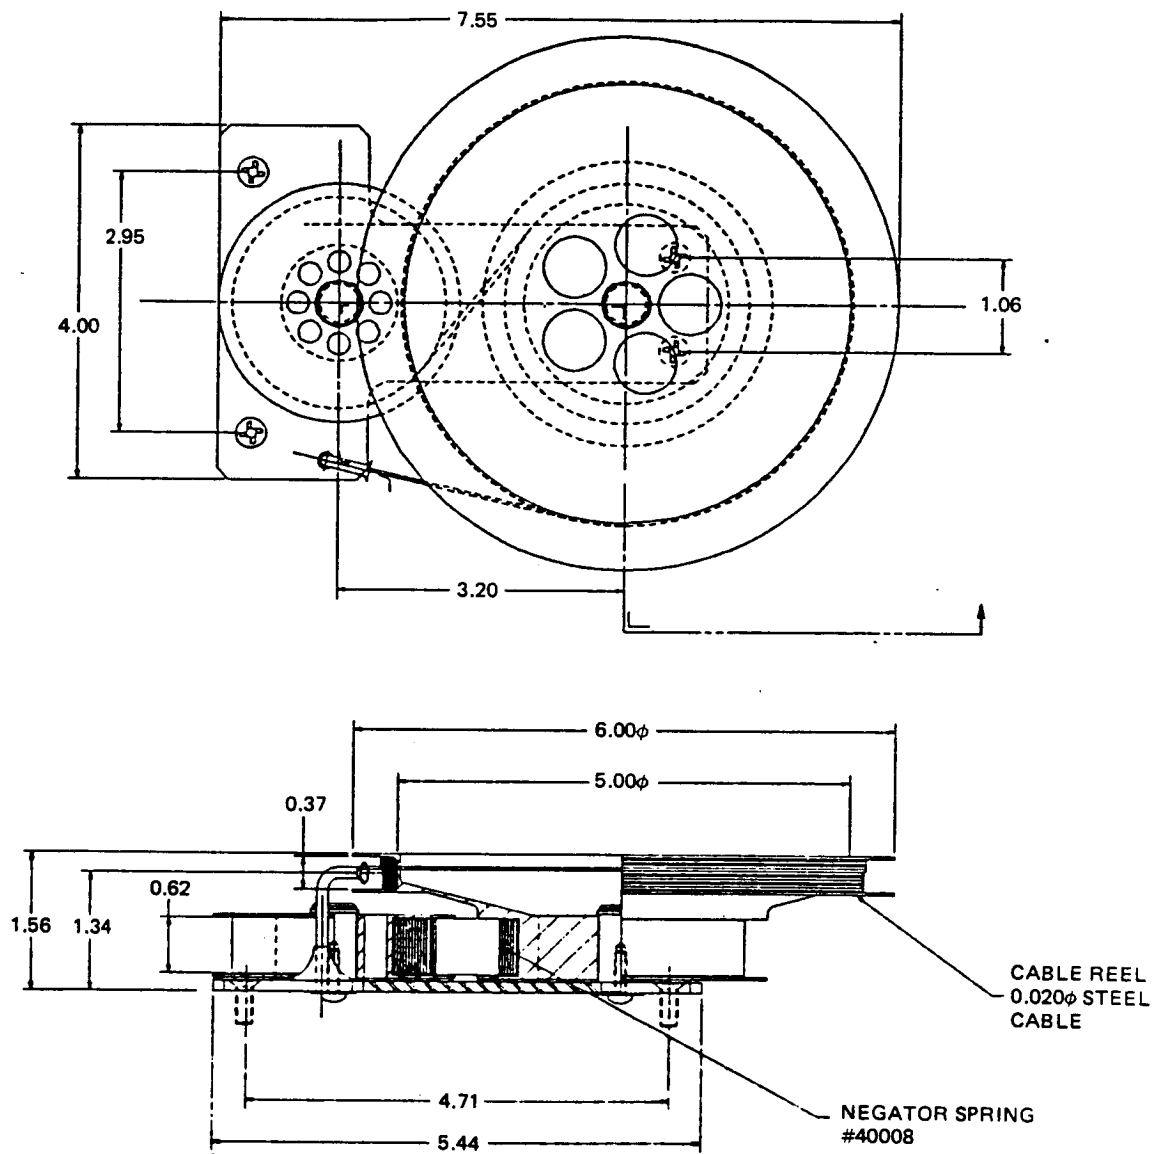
Negator Spring Tensioned Guidewire Mechanism
